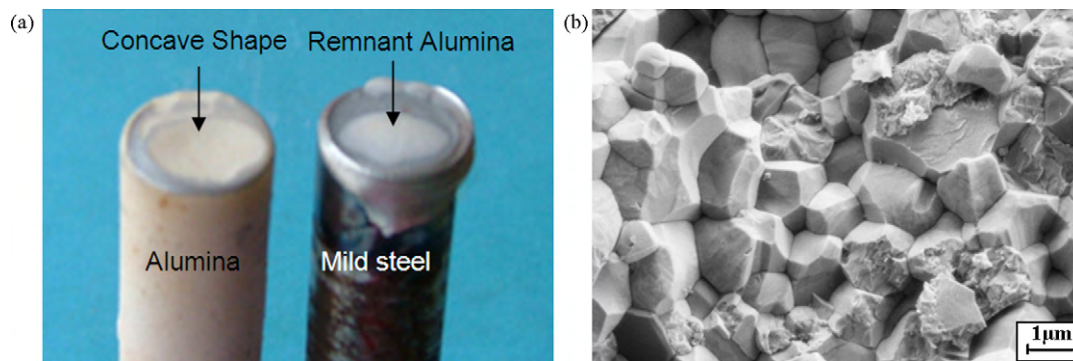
(a) The fracture surfaces of the alumina–mild steel interface joint and (b) the existing pores in the alumina rod.
